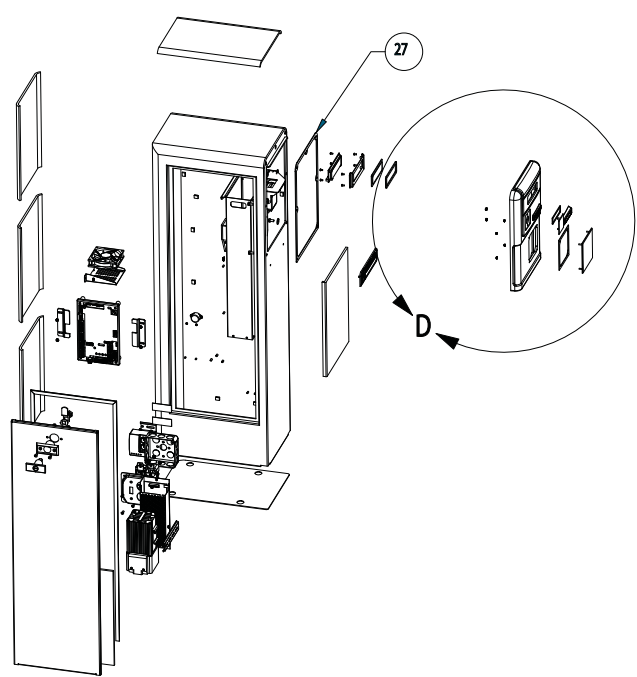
Barcode Exit Verifier (120VAC) Drawing, Detail D
